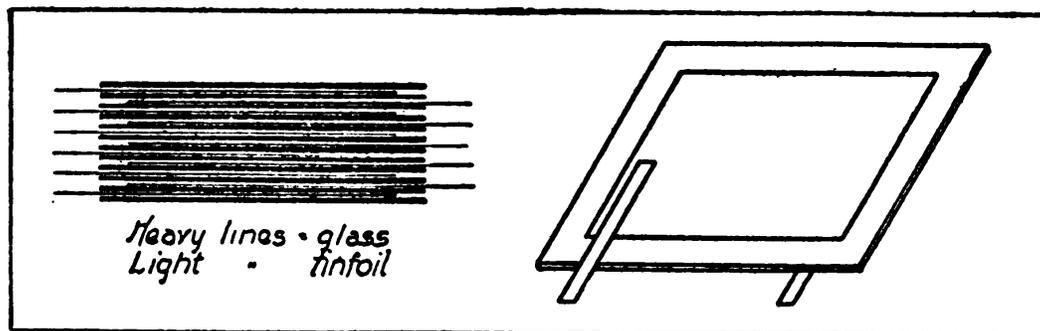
Single plate of the condenser coated on both sides with tin foil also the way in which ten plates are piled one on top of the other to form a complete unit. This assembling having been done with the entire lot of plates, the projecting lugs may be clamped with the pliers and soldered to short lengths of copper ribbon ready for connection with the bus-bars of the condenser. The plates of each unit should be bound with tape to afford mechanical strength and ease of handling. A plain piece of glass is placed on either side of each unit under the binding tape.
